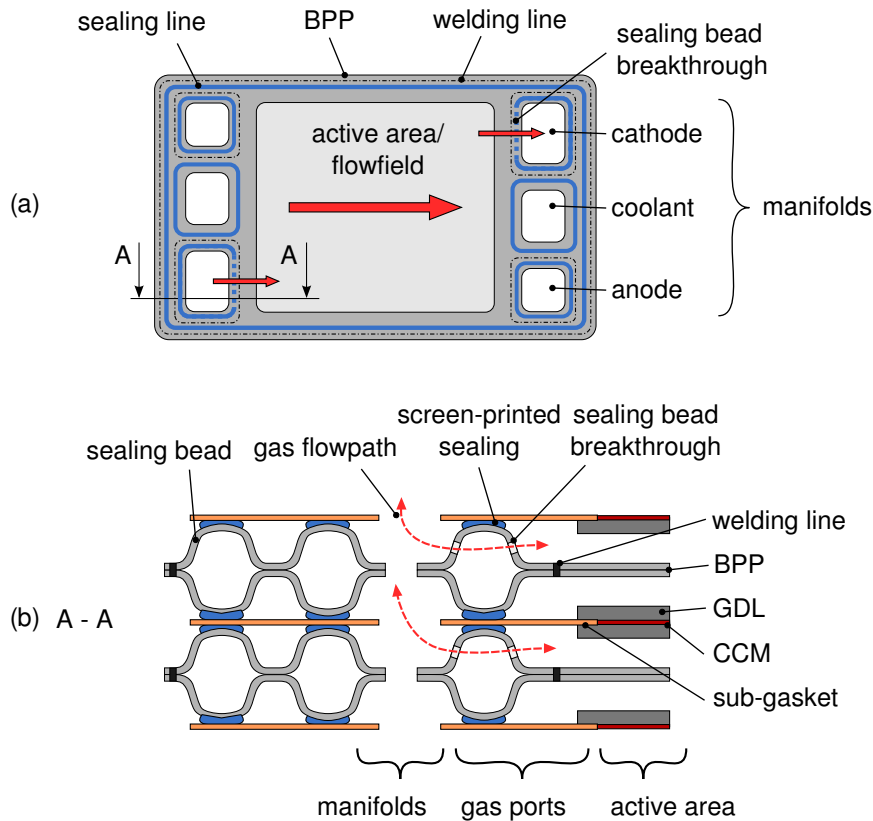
(a) View on the cathode side of a BPP with indicated sealing and welding lines. The solution requires a CCM with a SG, in order to protect the CCM from mechanical damage. (b) The sealing structure comprises a metallic bead with a screen-printed sealing on it. Gas supply and discharge is performed via breakthroughs in the bead.
